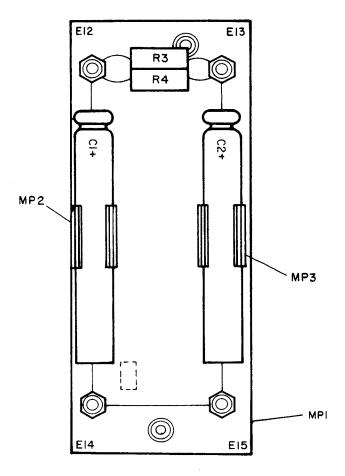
Filter Assembly A2A6A7, Component Locations
